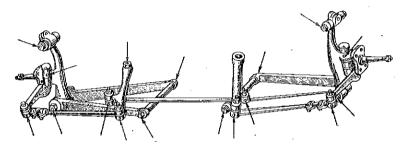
Lubrication Points of King Pins, Front Suspension and Steering Rod Joints
